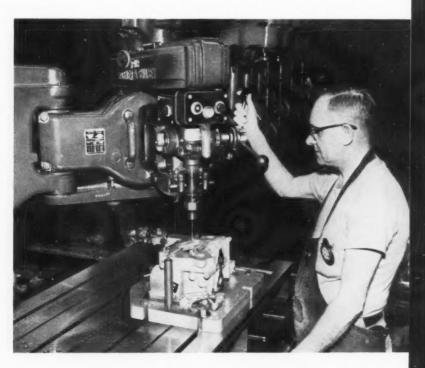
The master plate serves the dual purposes of locating and protecting the work during subsequent machining.
